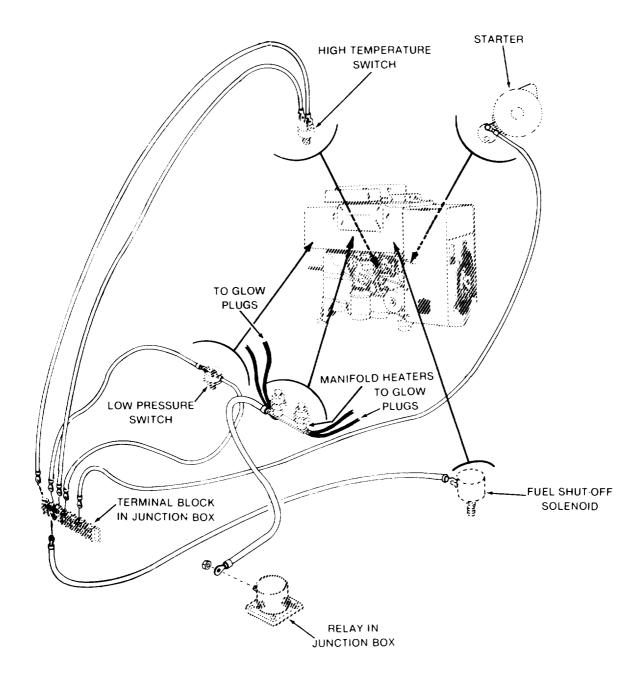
Starter High Temperature Switch, Low Pressure Switch, Fuel Shut-off Solenoid, and Manifold Heater Wiring.
